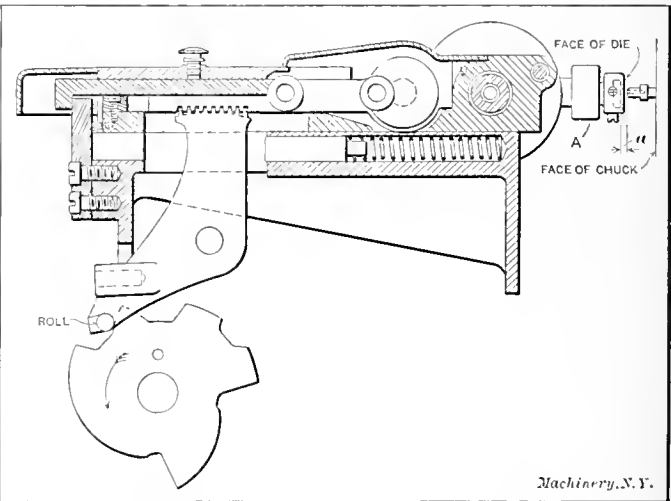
Position of Roll on Thread Lobe when setting Die or Tap
